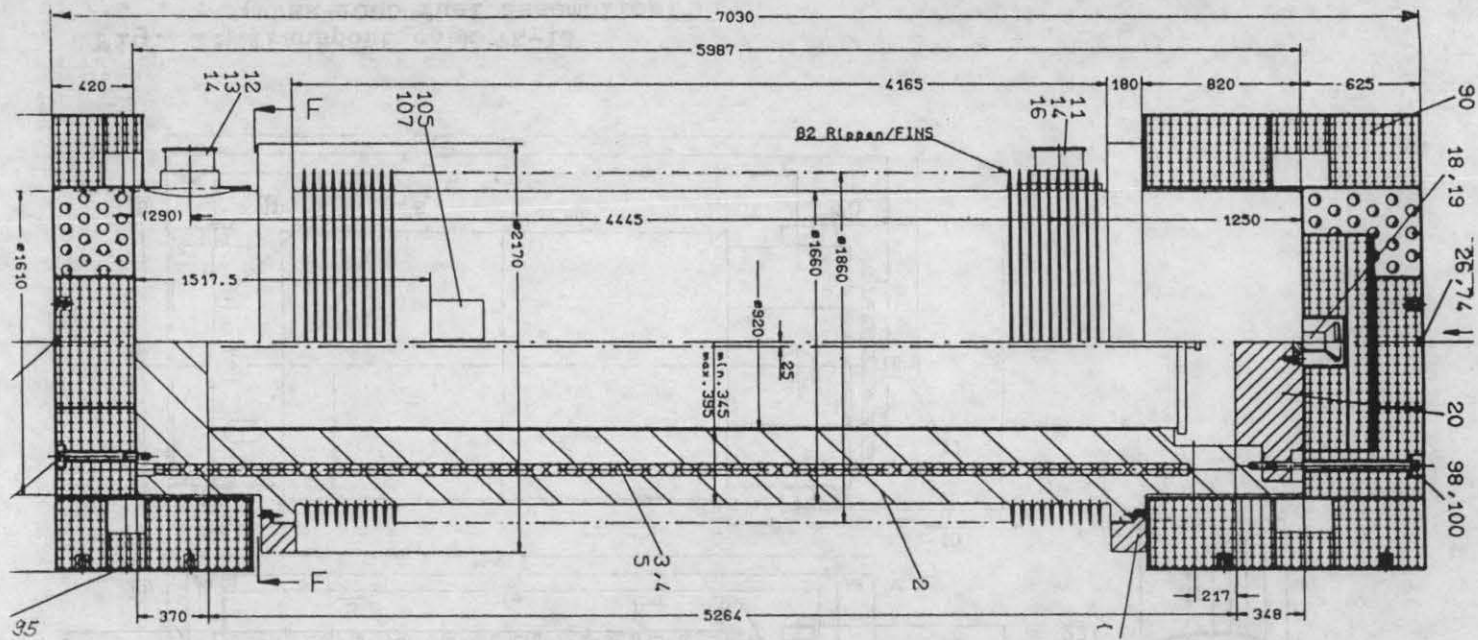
Shipping cask CASTOR S1 (Unterweser PWR fuel assemblies);
